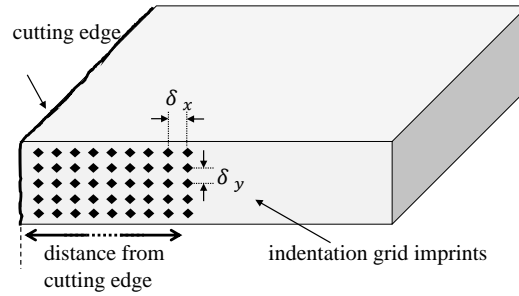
Micro-hardness measurement grid on the cross-section perpendicular to the cutting edge
